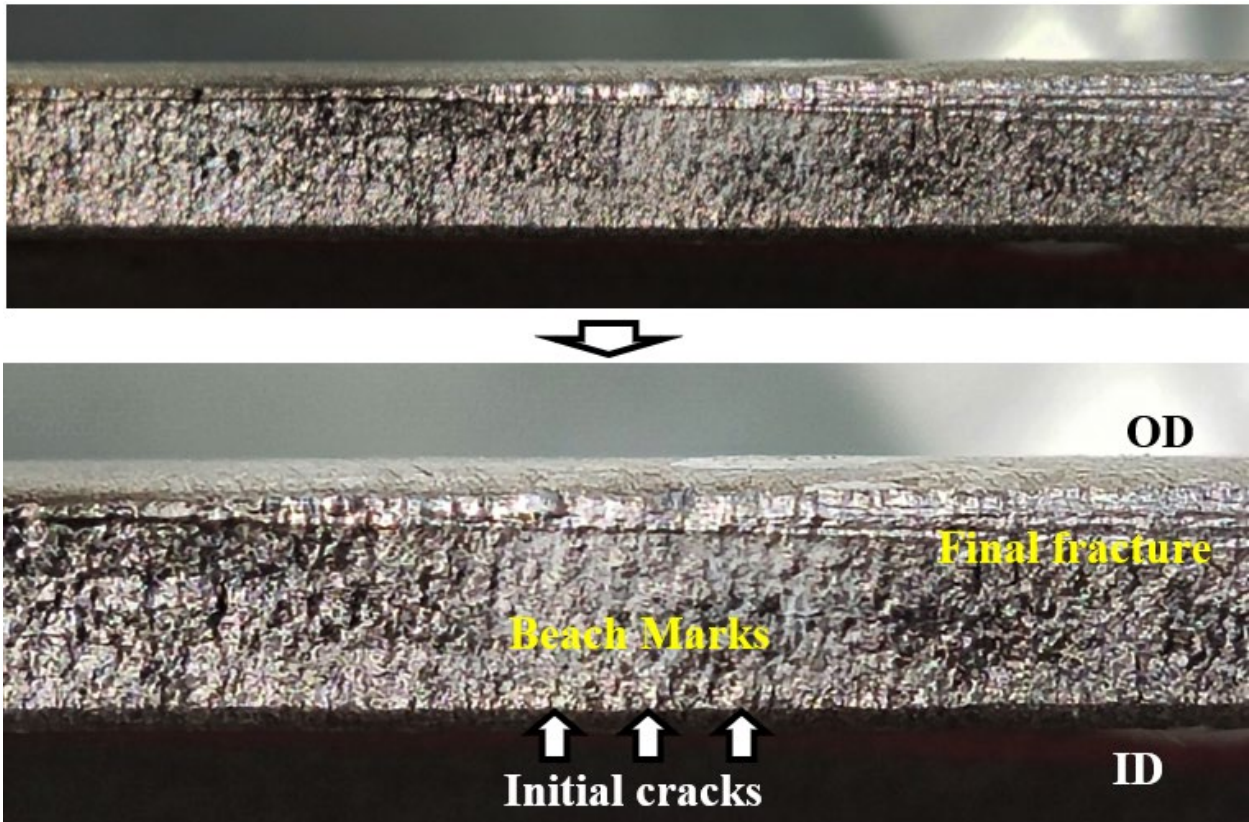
Low-magnification view of fracture surface of the leaking elbow pointing toward crack initiation from ID surface as well as beach marks and the final fracture at the OD side
